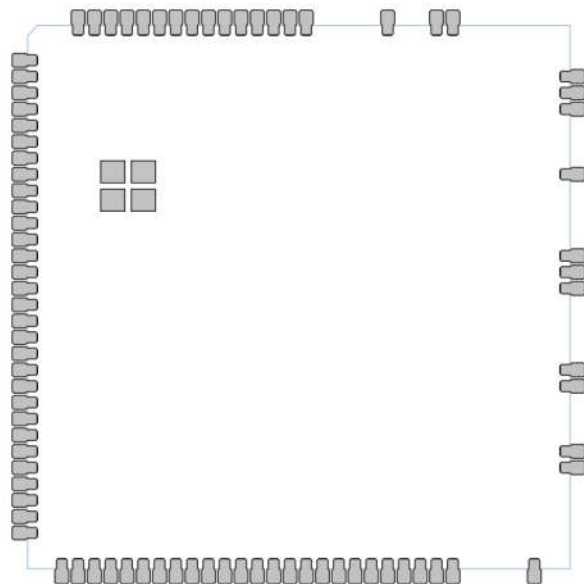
SOLDERING PASTE FOOTPRINT (TOP VIEW)
